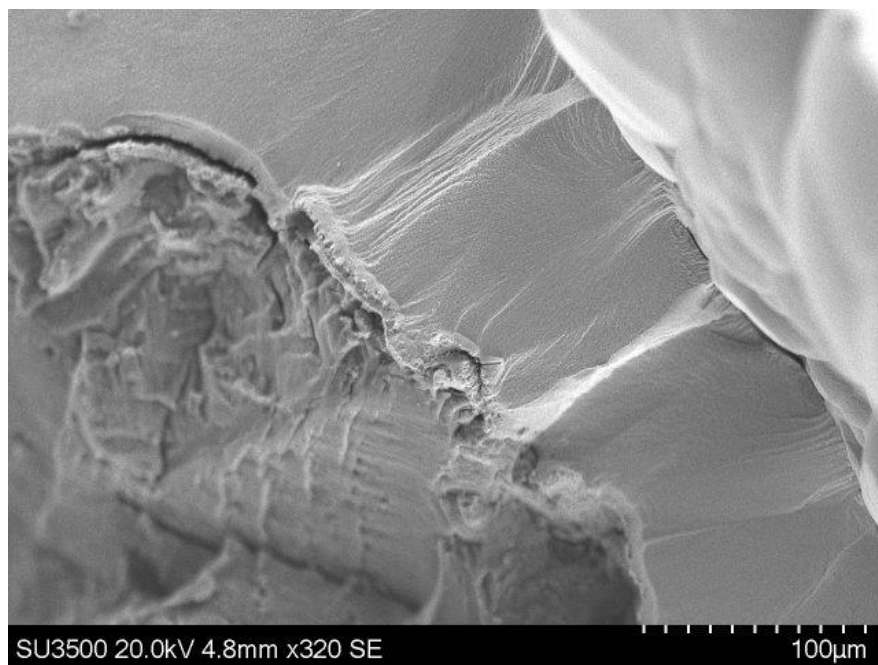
Location D on the fracture surface of Specimen H2.
